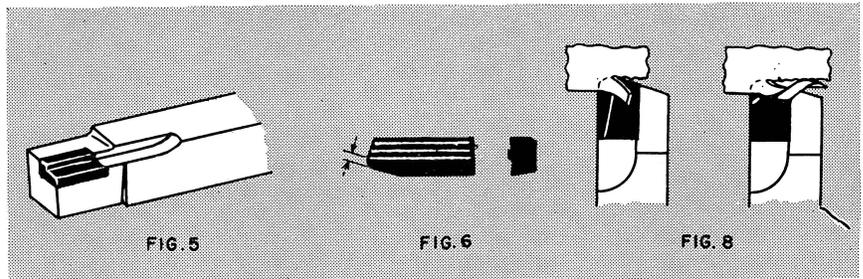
Undesirable design of a carbide tool. Chip-breaker grinding wheel cuts into shank material. FIG. 6 . . . Carbide insert, with factory-ground chip breaker of the positive angular type. Effective width  $w$  is measured at the tool point. FIG. 8 . . . Two angular chip breakers with different negative opening angles. When the opening angle is too large, the chip may hit the finished surface and cause damage
